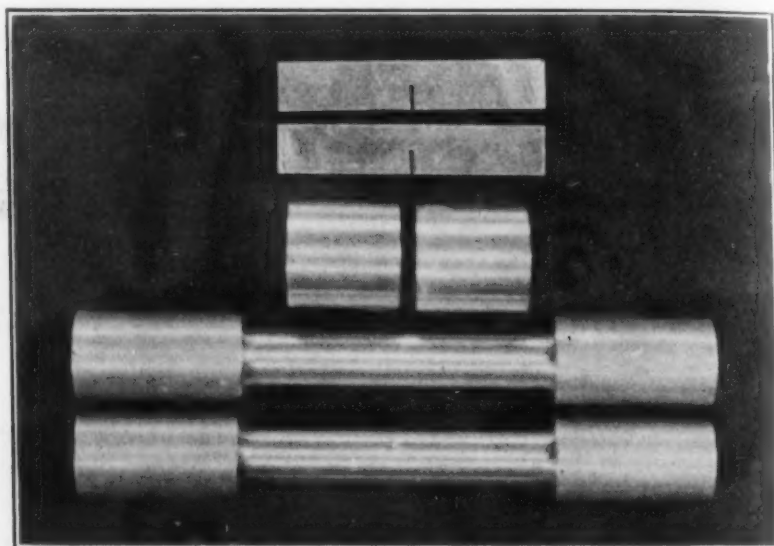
Tensile, Corrosion and Impact Specimens for Test Cylinder. Reduced One-Half Size.
